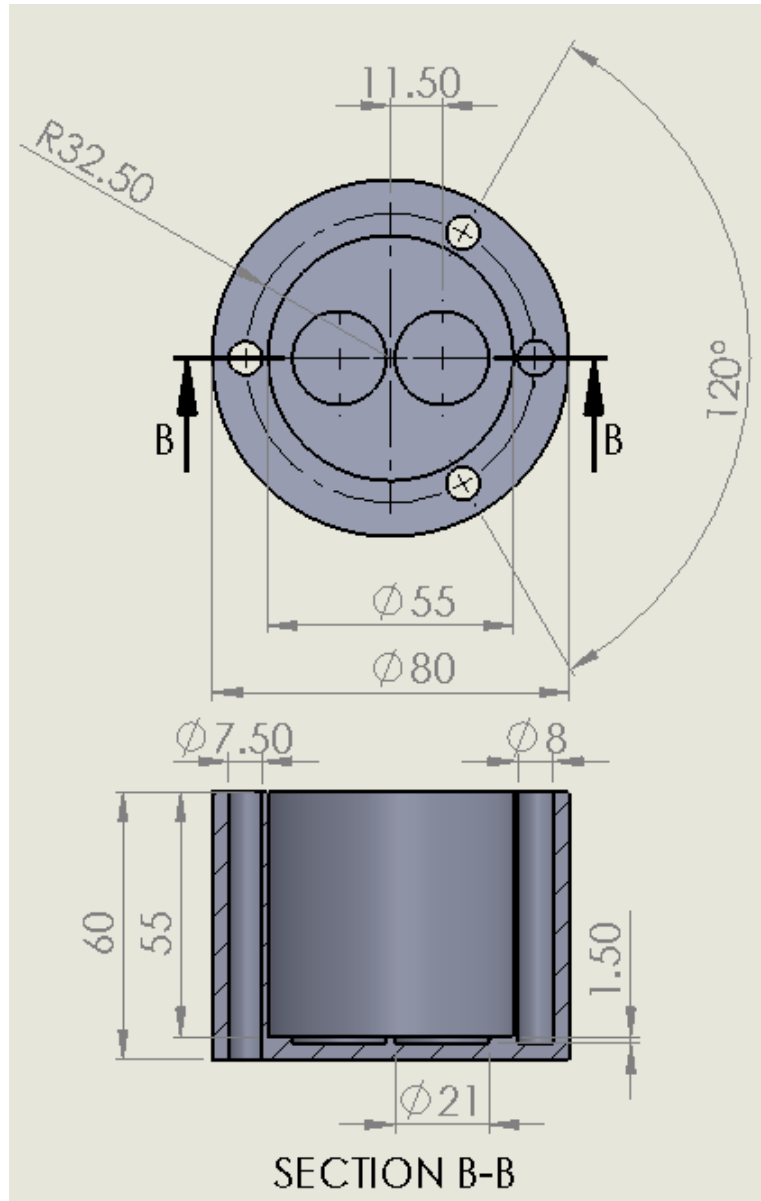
Dimensioned drawing of the secondary container to house two 20 mm OD crucibles.
